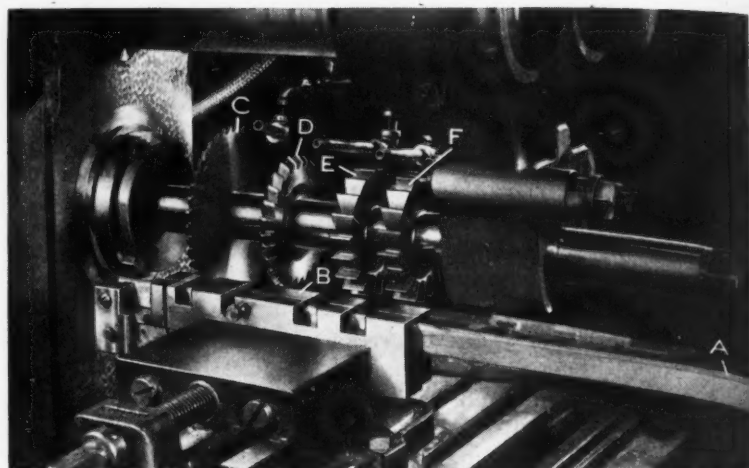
Milling Machine Equipped with Progressive Fixture for Production of Piece Shown at W, Fig. 2
